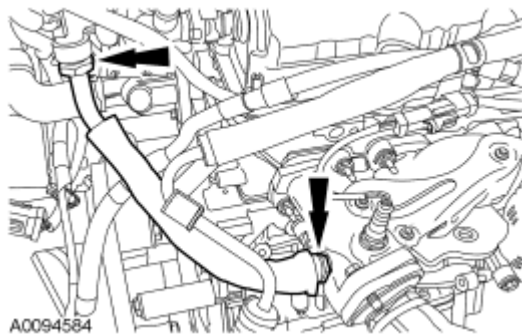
Locating Exhaust Gas Recirculation (EGR) System Module Tube
